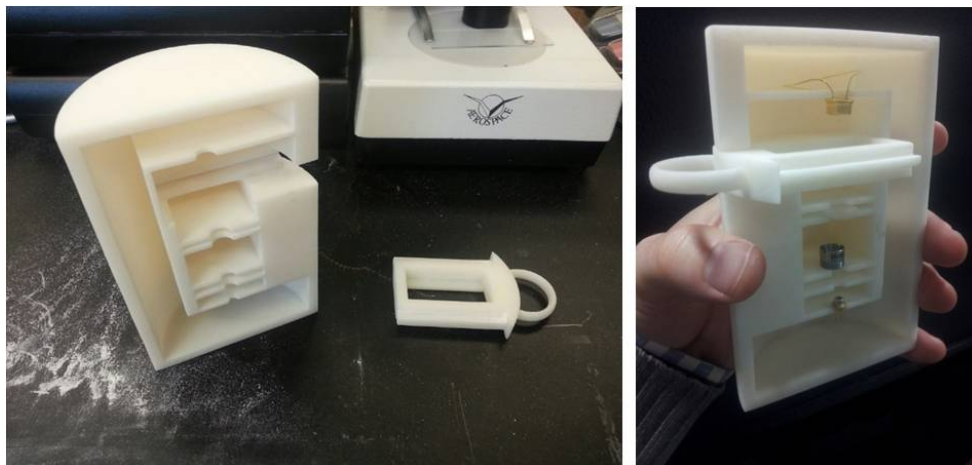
Completed 3D printed module Left: the actual-size housing/casing immediately after 3D printing. Right: optical components (from bottom to top: laser diode, collimating lens, polarizer, and photodetector) inserted into the module.
